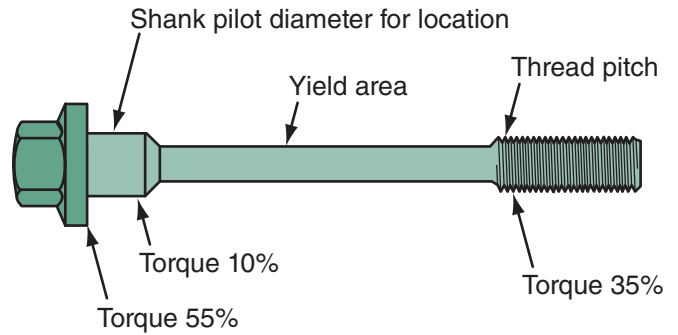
Torque-to-yeild (TTY) bolts are designed with a reduced shank diameter; this is where the intended stretch occurs.
